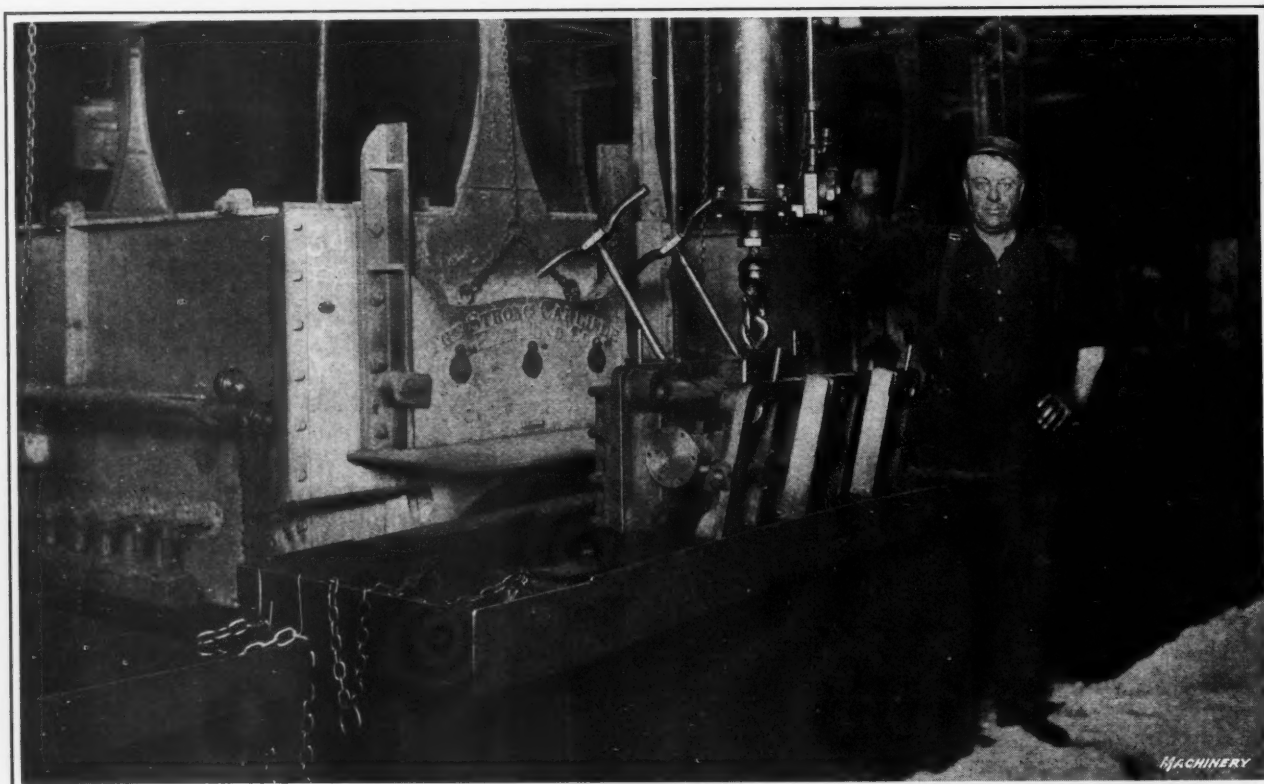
Special Fixture or Hardening Die which grips the Crankshaft to prevent Distortion when it is quenched for hardening
